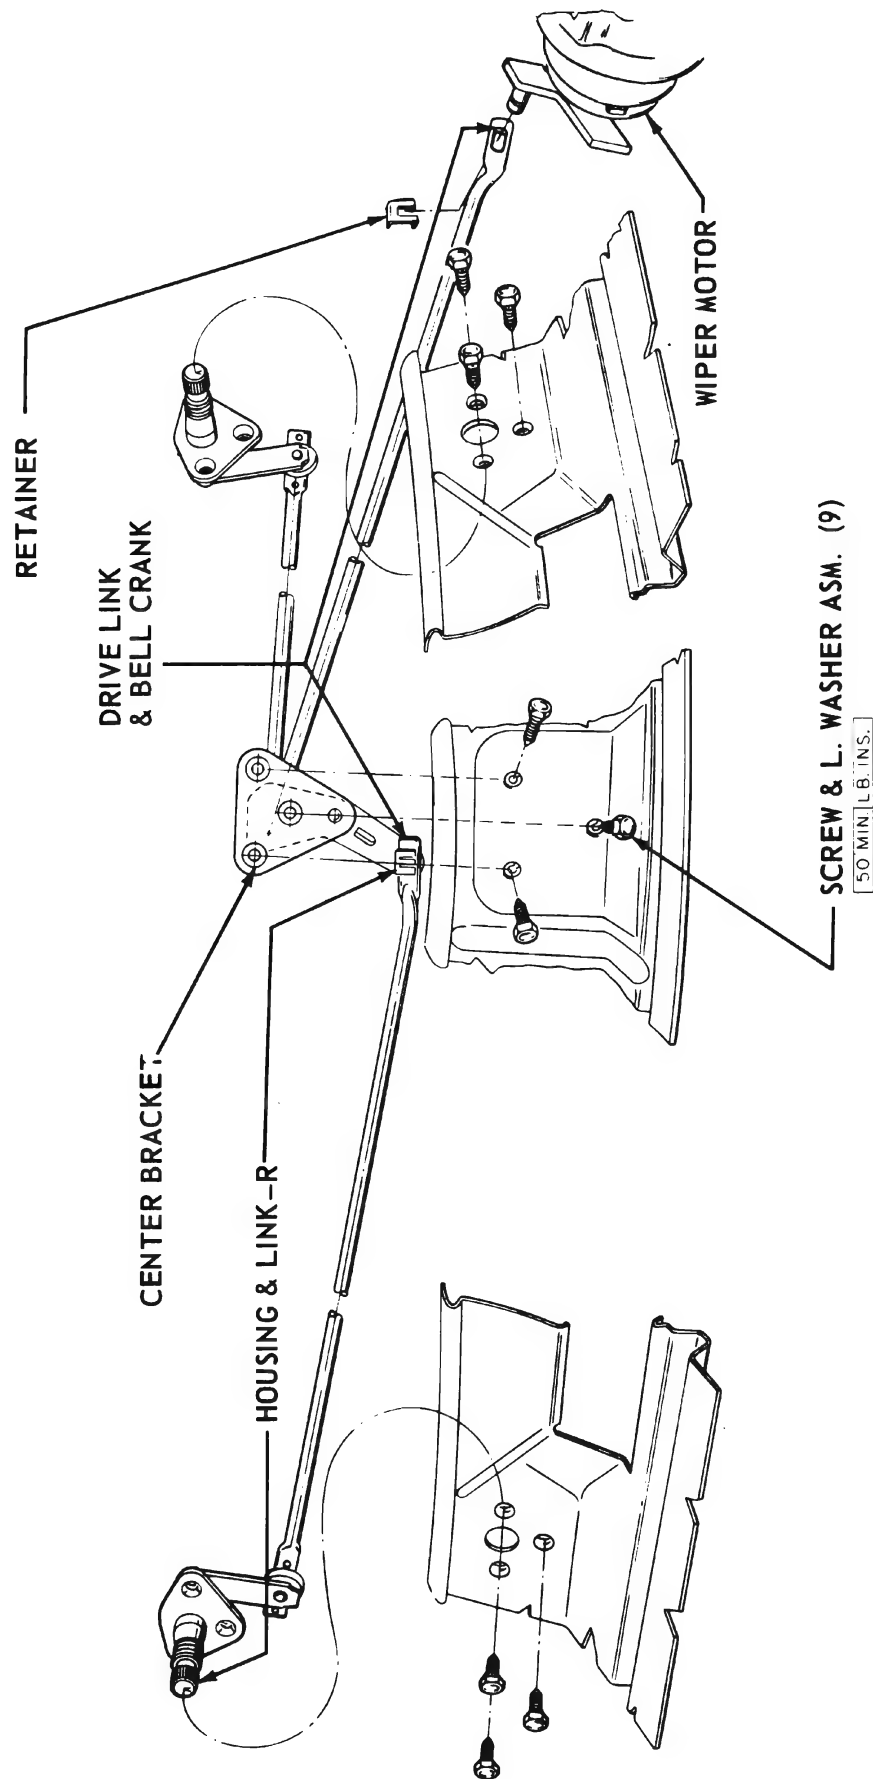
Windshield Wiper Linkage Installation—Riviera
